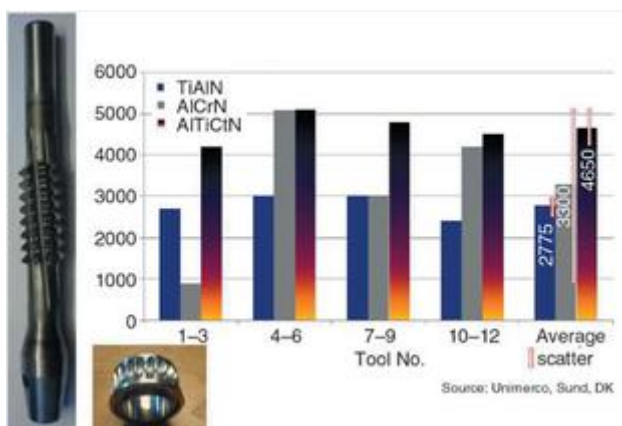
Hobbing with AlTiCrN coated tool: material, 34CrNiMo6 (1.6582), $v_c = 45$ m/min, $f = 0.12$ mm, $n = 500$ /min, cutting fluid, oil,
